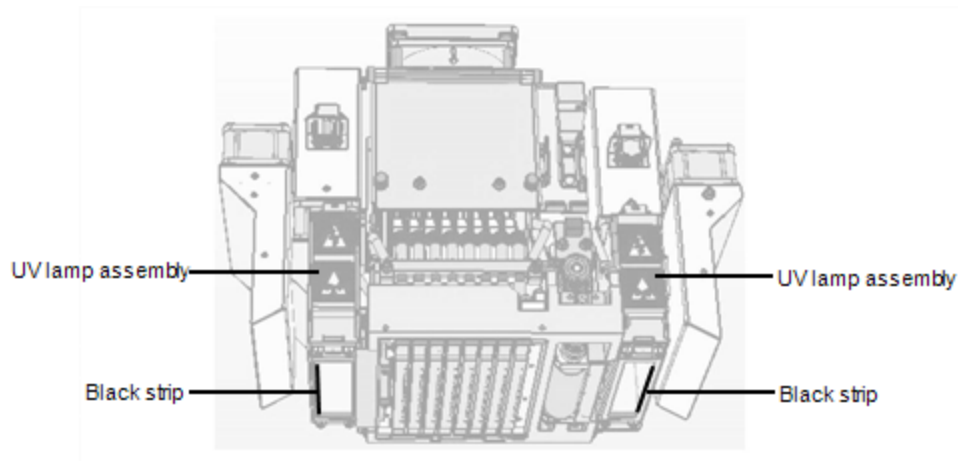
Print block and UV lamp assembly, showing correct placement of black strip
